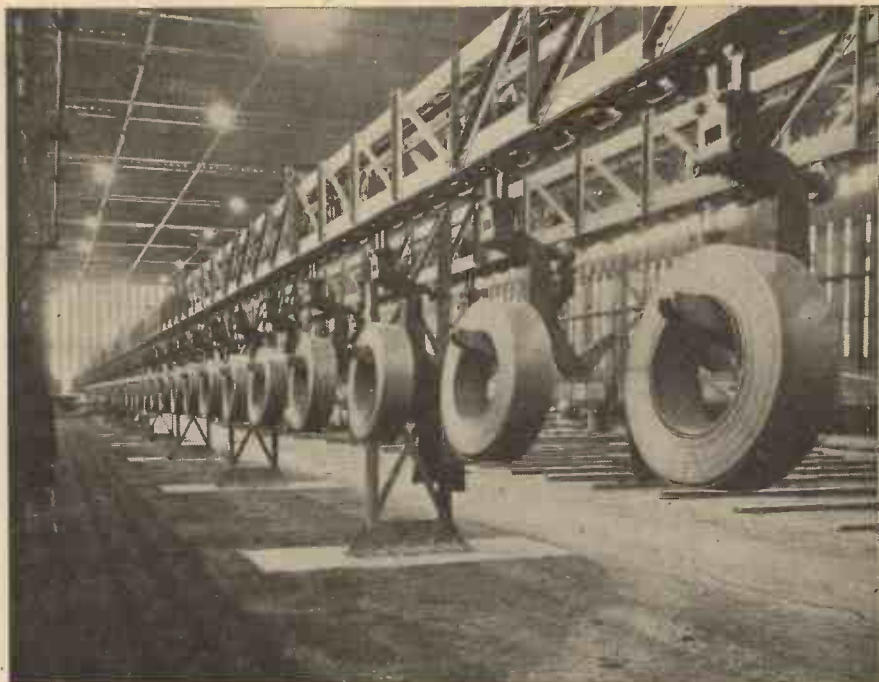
Reels of steel strip travelling on a hook conveyor from rolling mills to tube mills.
